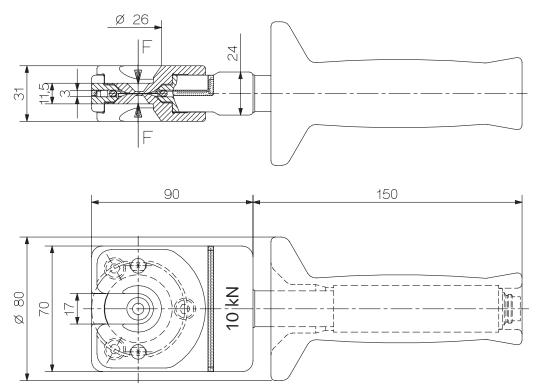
Welding force sensor Type 9831C... with charge amplifier included and plastic handgrip (removable)
